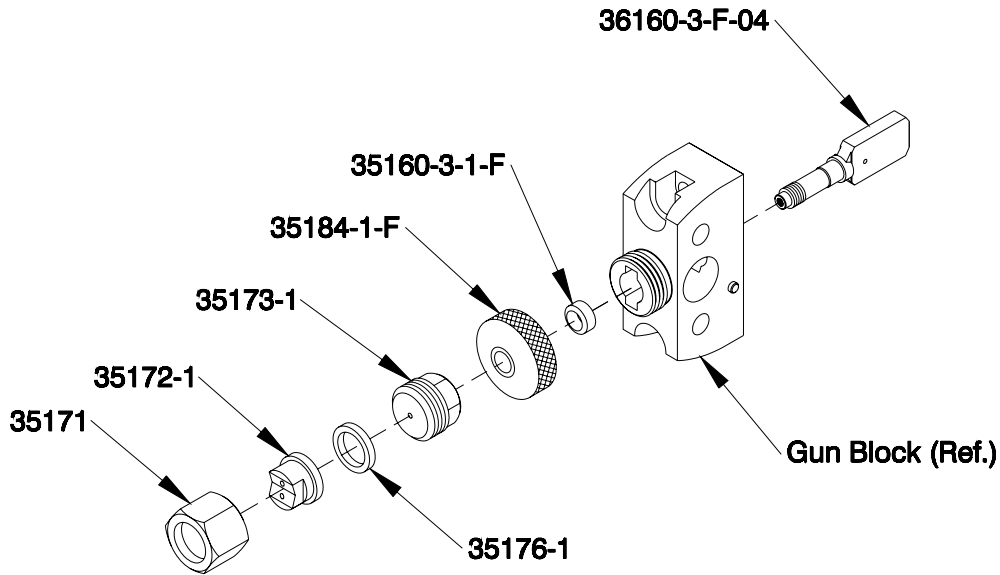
Spatter Spray Assembly (Part No.36100-F-04-S), Exploded View
